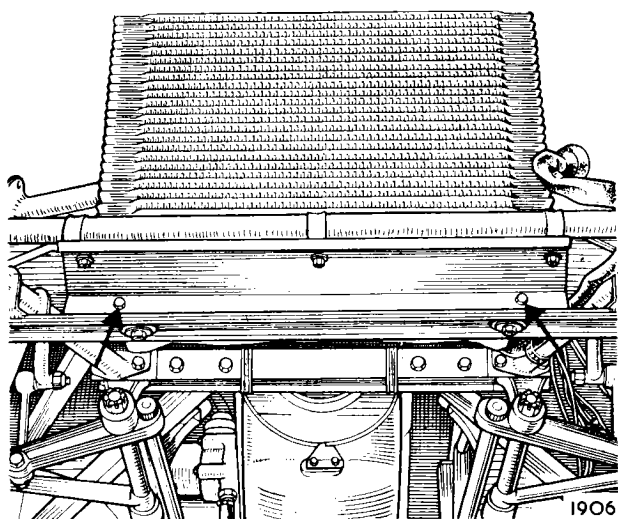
Bolts securing the sub frame shield to the radiator mounting brackets
